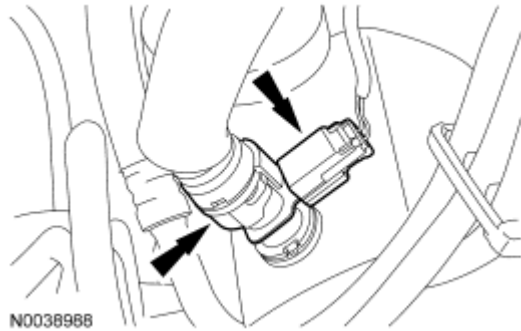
Locating Crankcase Vent Hose Valve Electrical Connector
